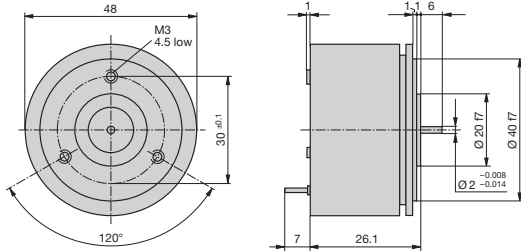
KINAX 3W2 with standard drive shaft at front only, Ø 2 mm, length 6 mm.
